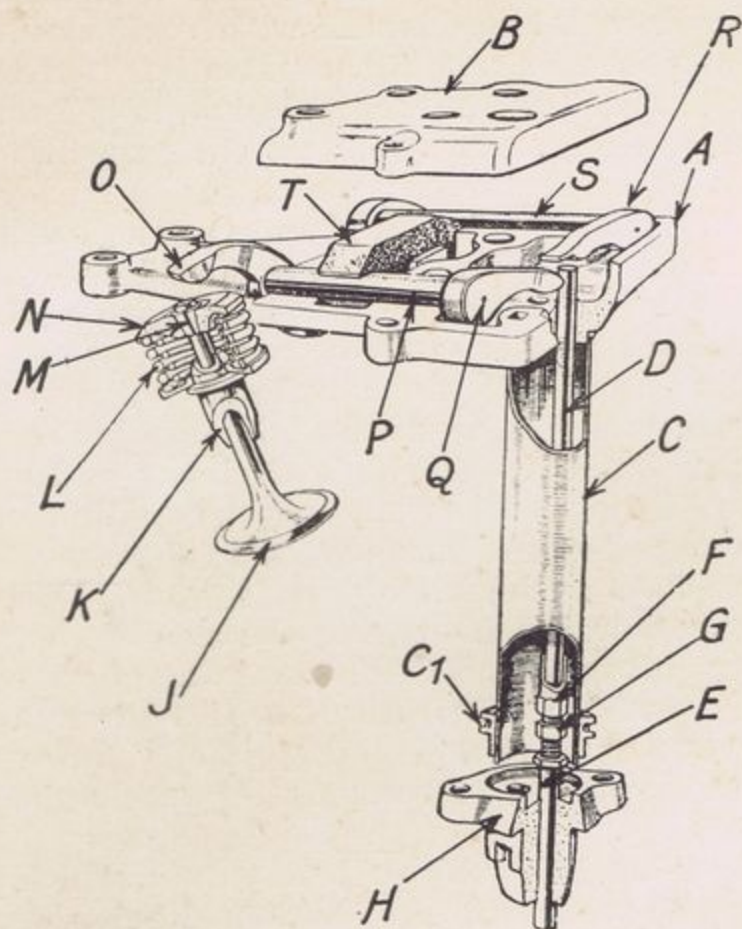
SHOWING THE OVERHEAD VALVE MECHANISM
